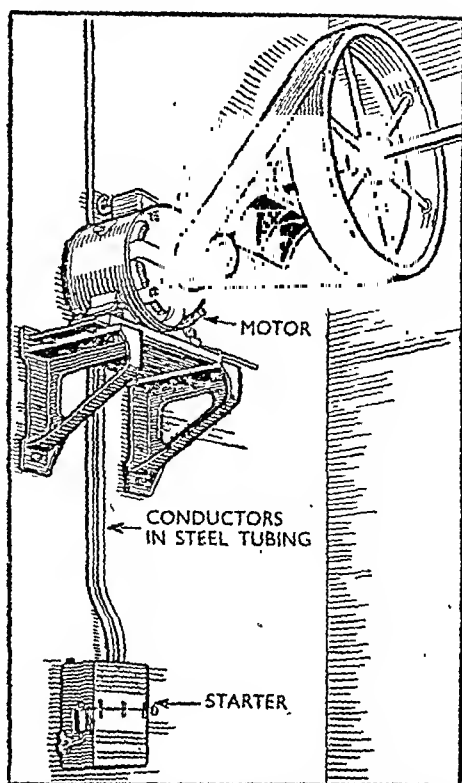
15-h.p. motor with multiple V-belt drive. Note short distance between driving and driven shafts.
